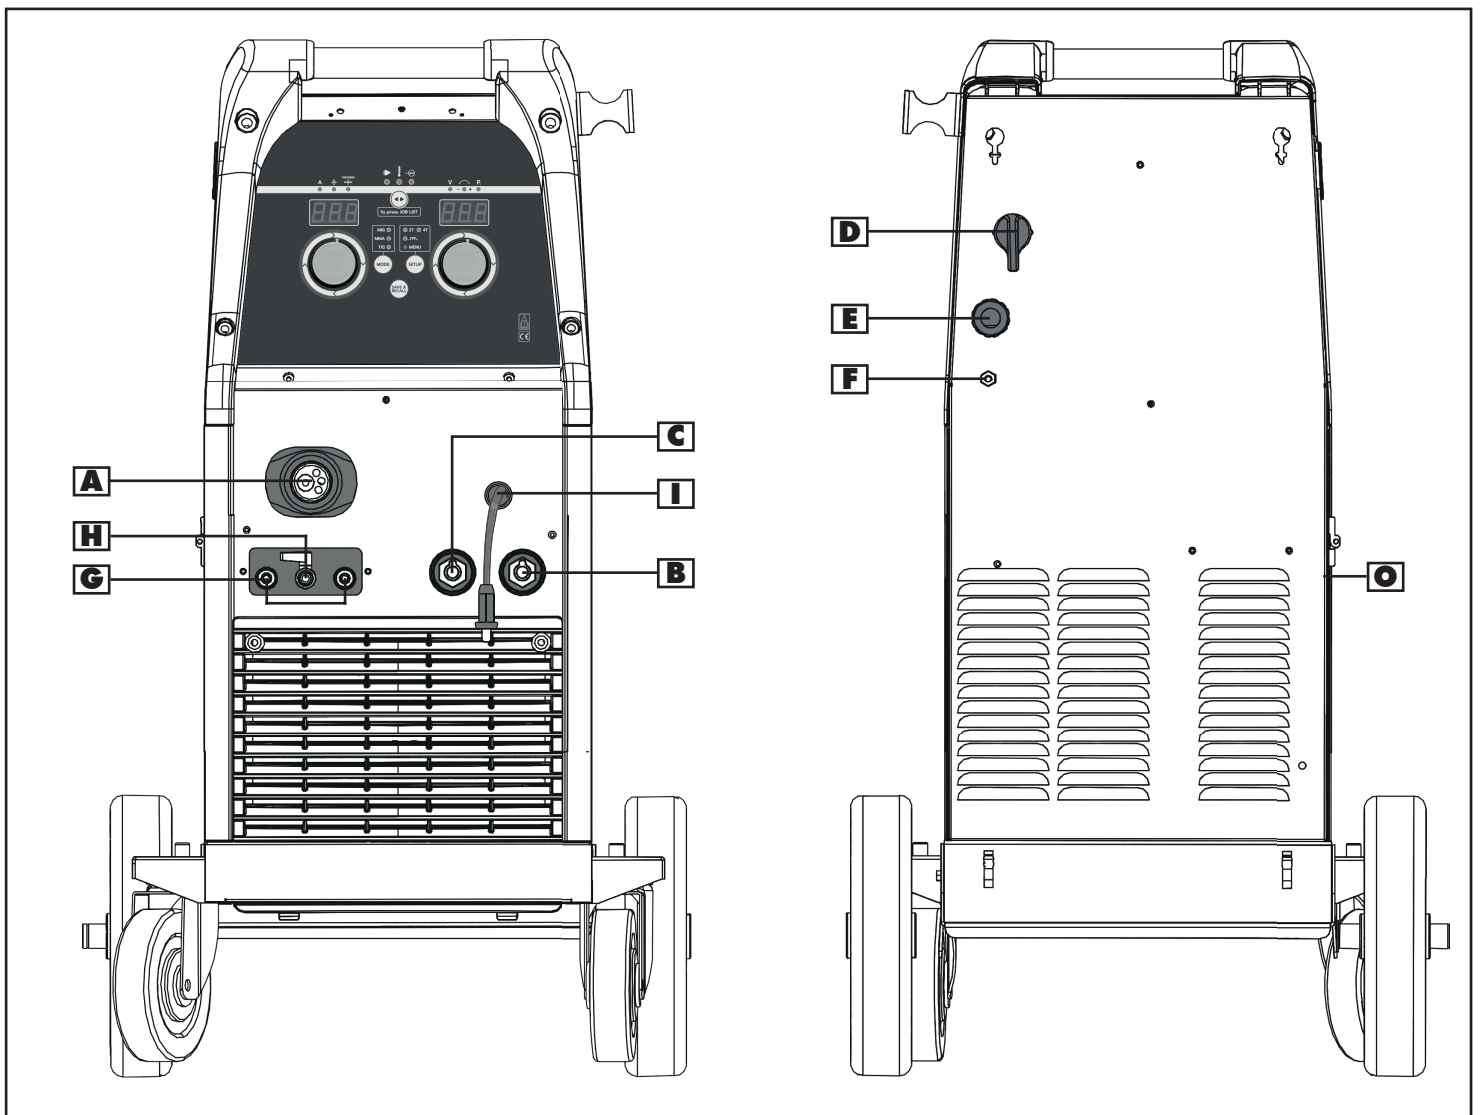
Unitech 358C: Front and back view of the compact welding unit on wheels
